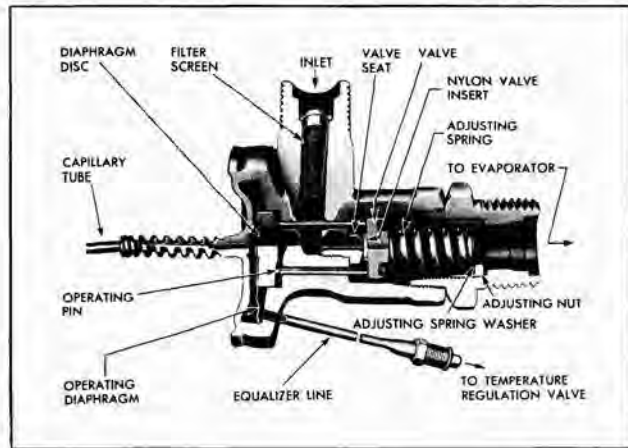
Cross Section of Thermostatic Expansion Valve
